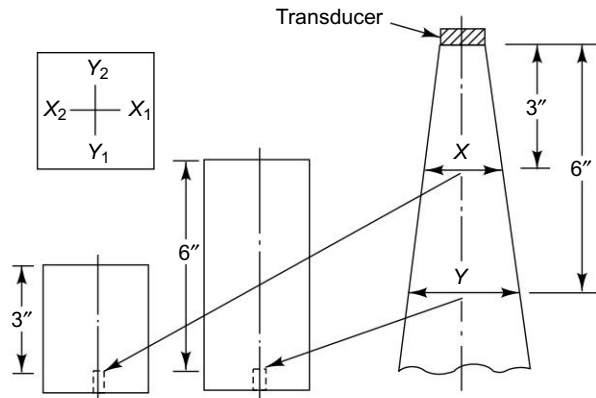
Beam Plotting Using Flat Bottom Hole
